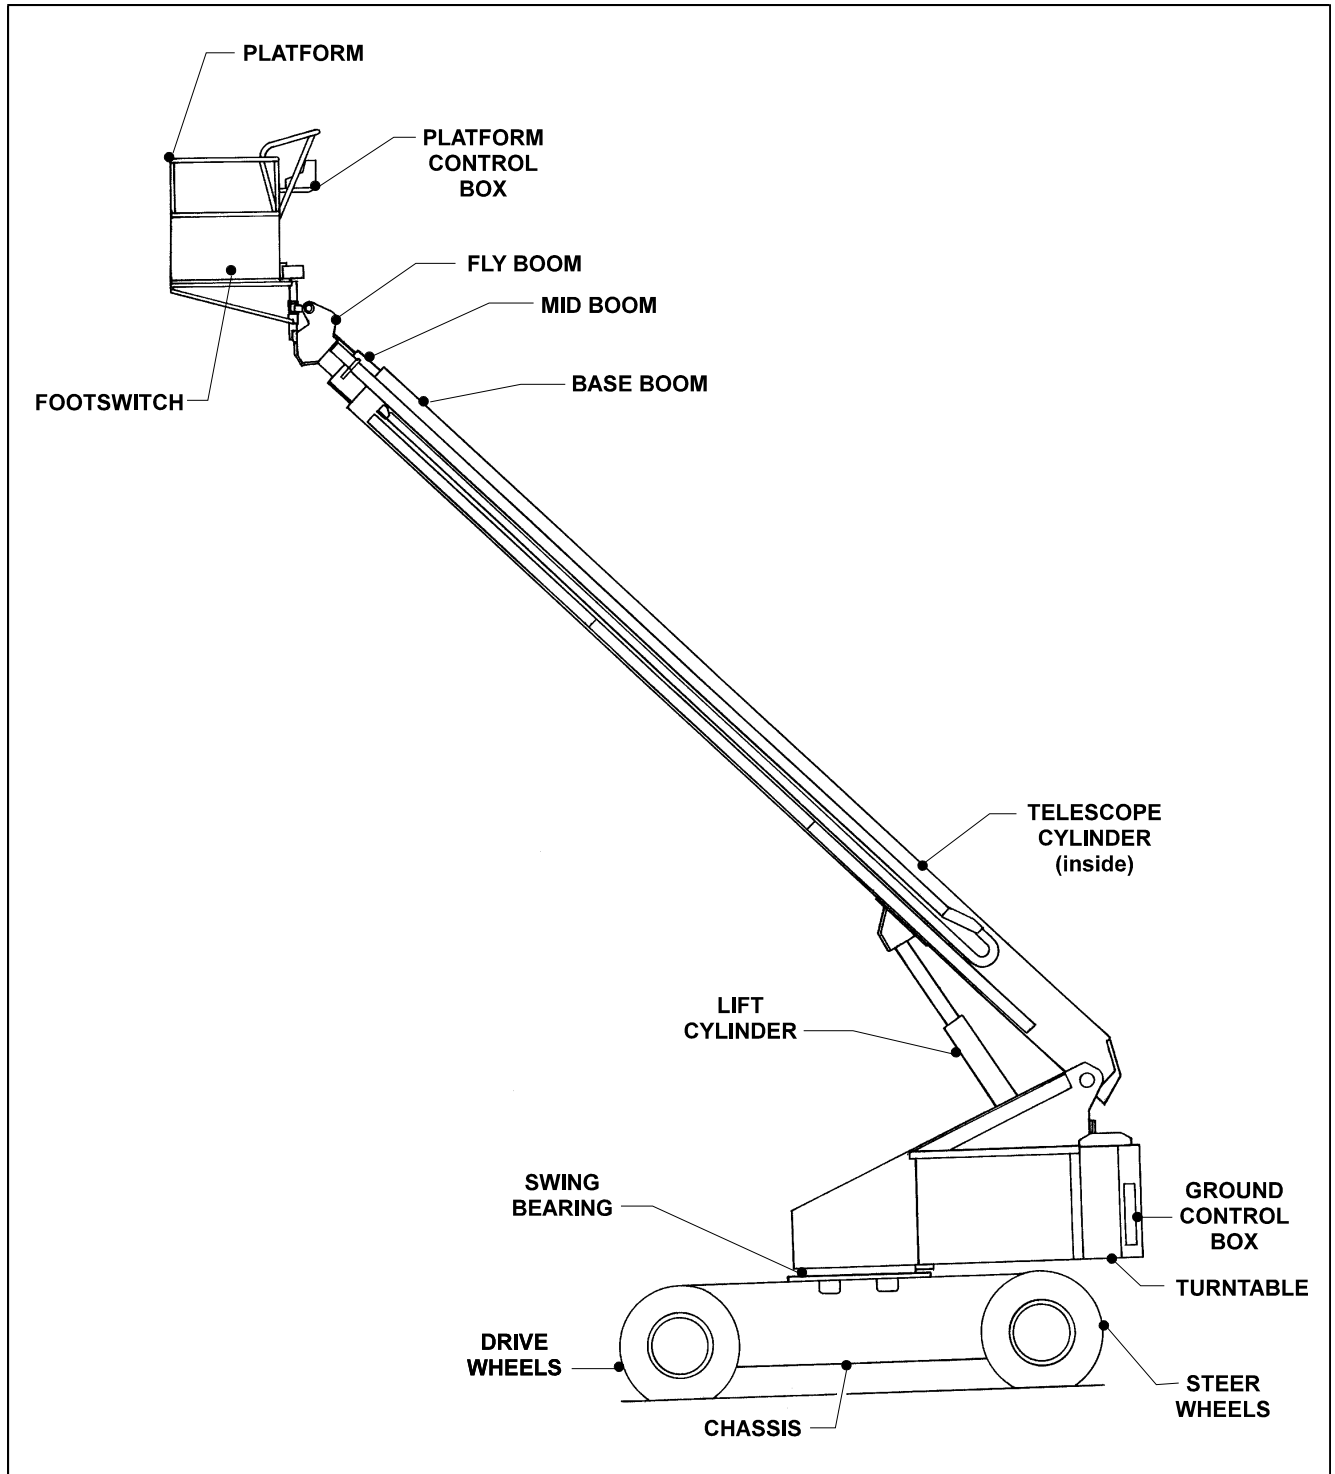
Machine Nomenclature - 100SX and 110SX
